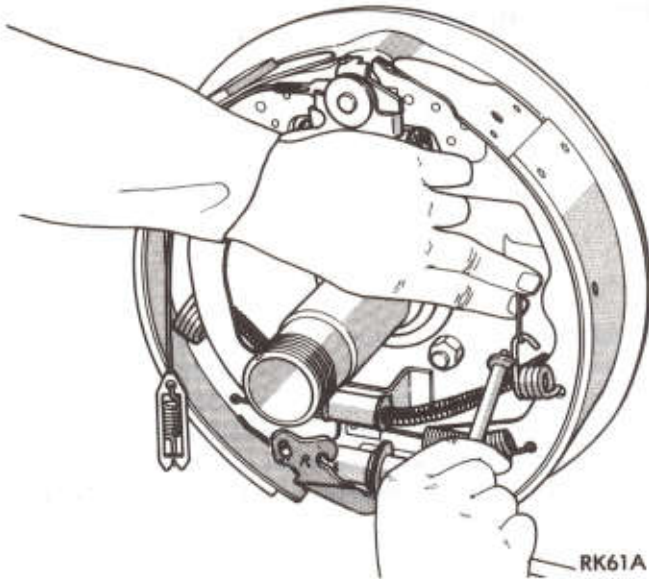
Removing or Installing Shoe Hold-Down Springs (Rear)
